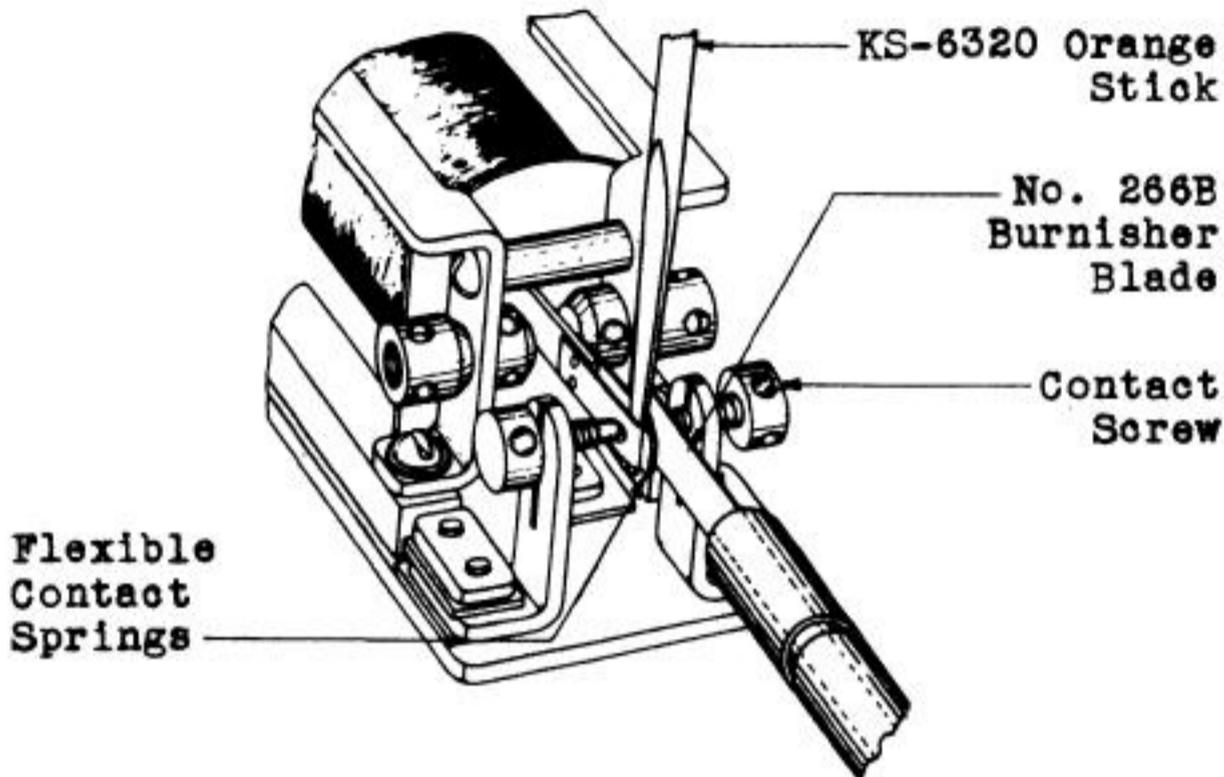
Method of Burnishing Contacts on 206, 209, 215, 231, 239 and 255 Type Relays
